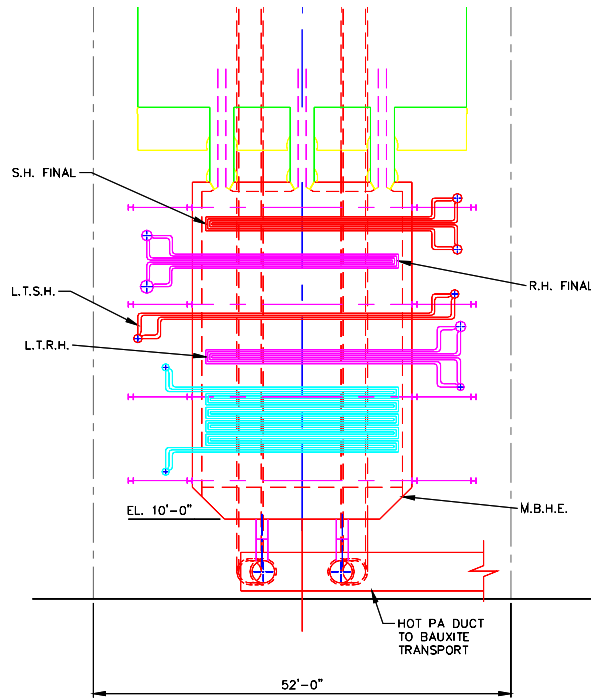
6: CMB™ Moving Bed Heat Exchanger Surface Arrangement
